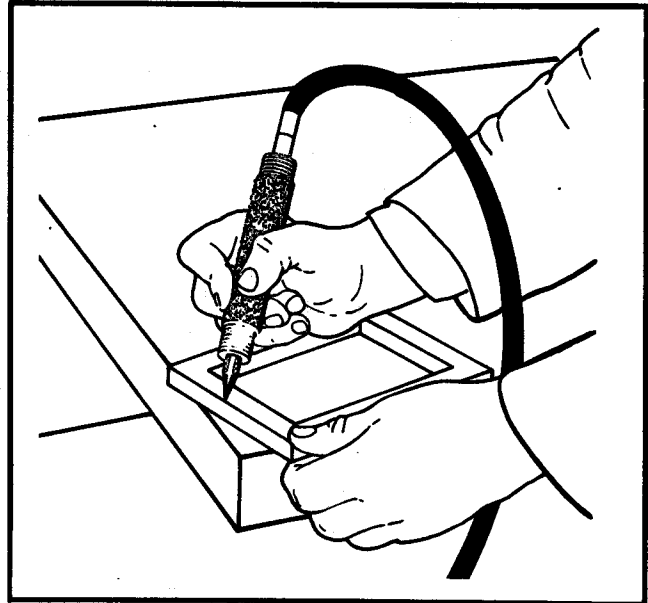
USING ETCHING PENCIL WITH BAND SAW.
